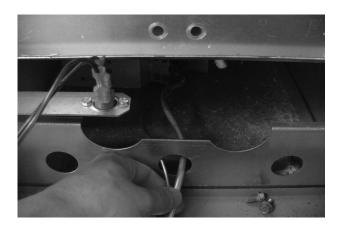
Installed Pilot Assembly (3 Section Shown)
